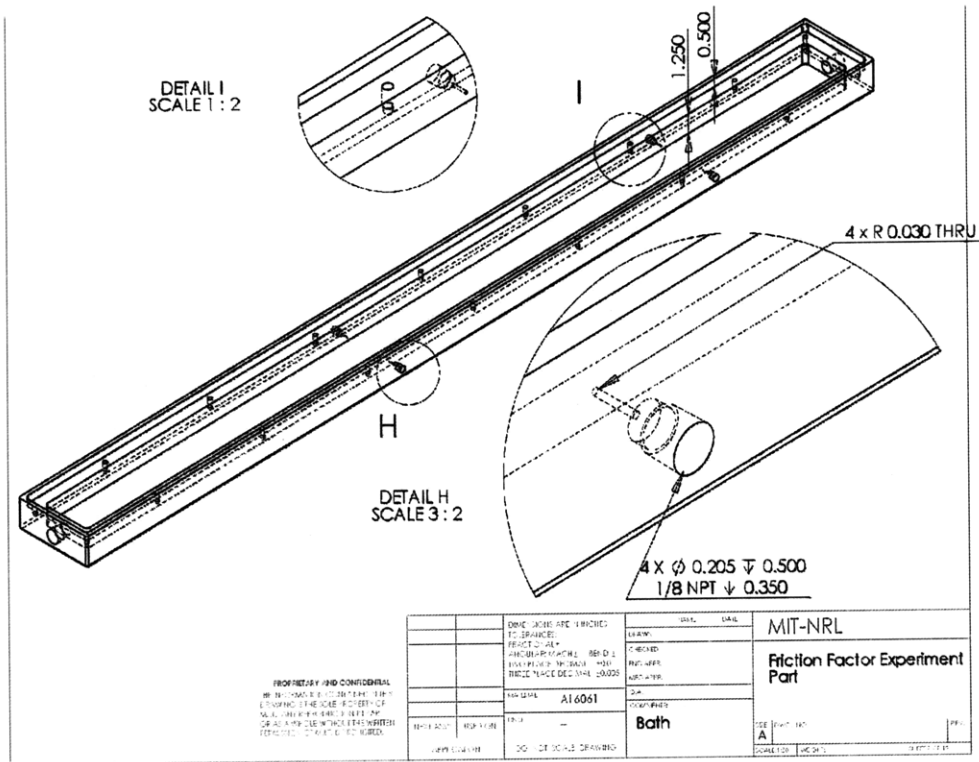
Four static pressure taps on two sides of the bath component of the test assembly.
